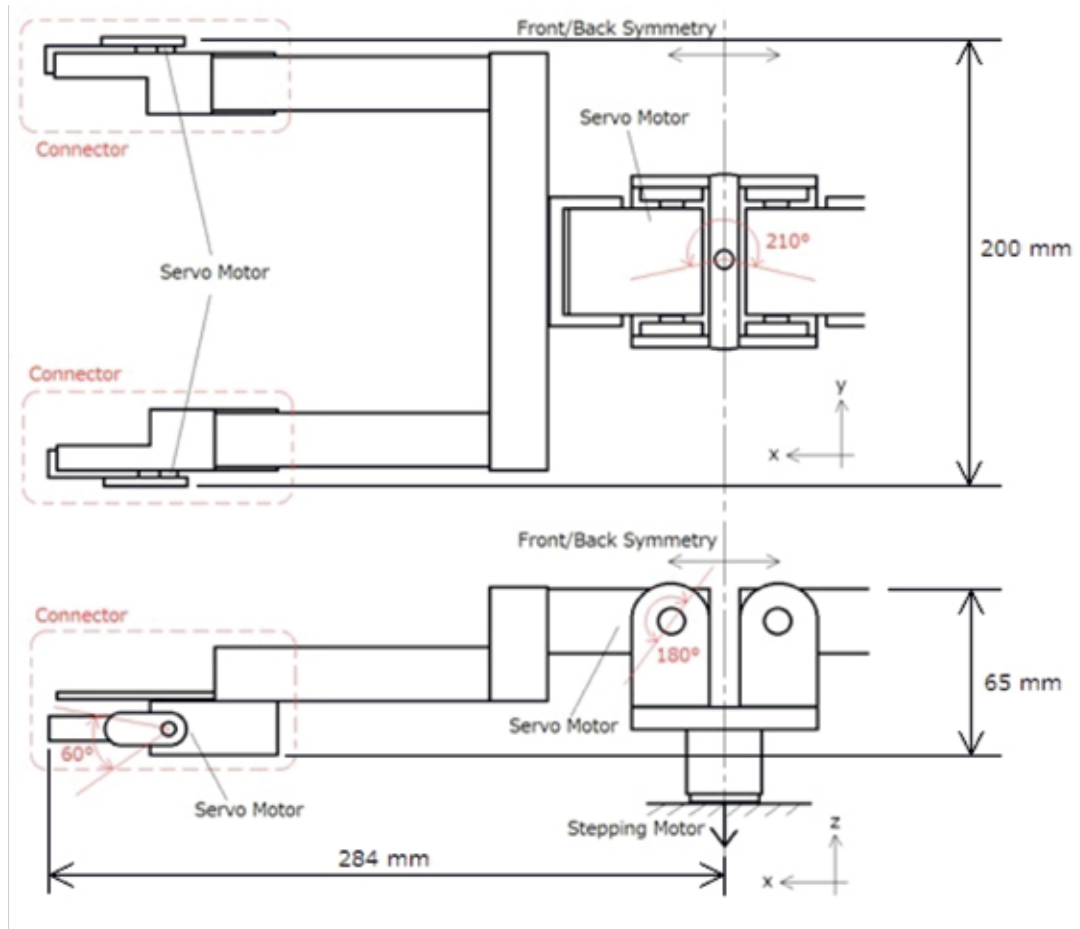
The structural drawing of the repair manipulator using the prototype connector.
